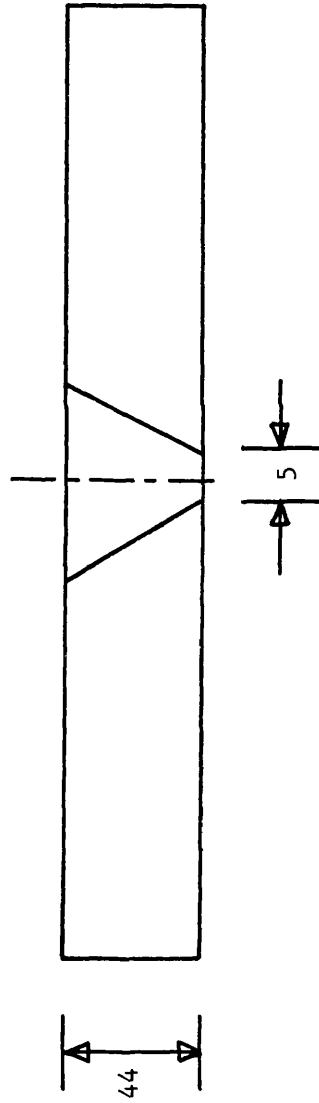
(a): Stainless Steel Weld Specimen 1
